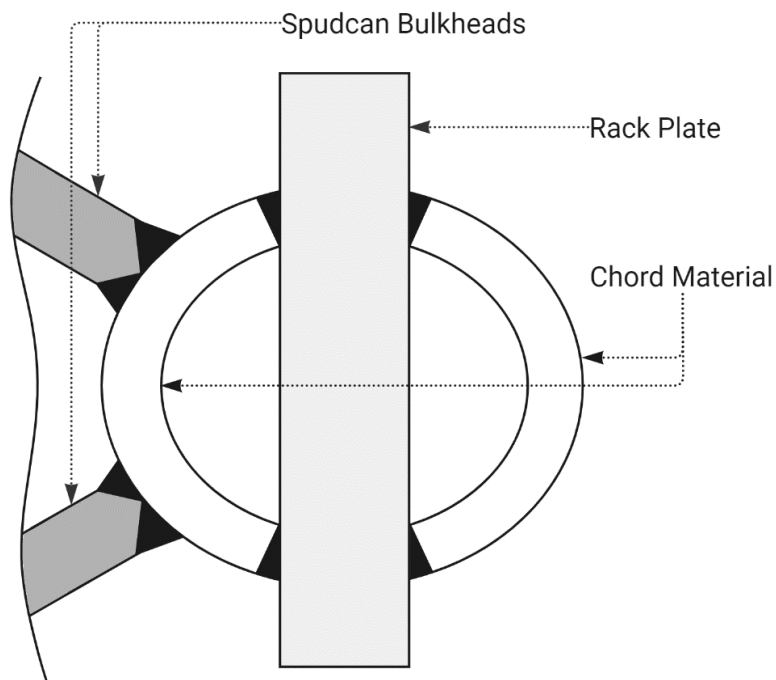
Top view through a jack-up leg showing the position of chord, rack and spudcan bulkheads.
